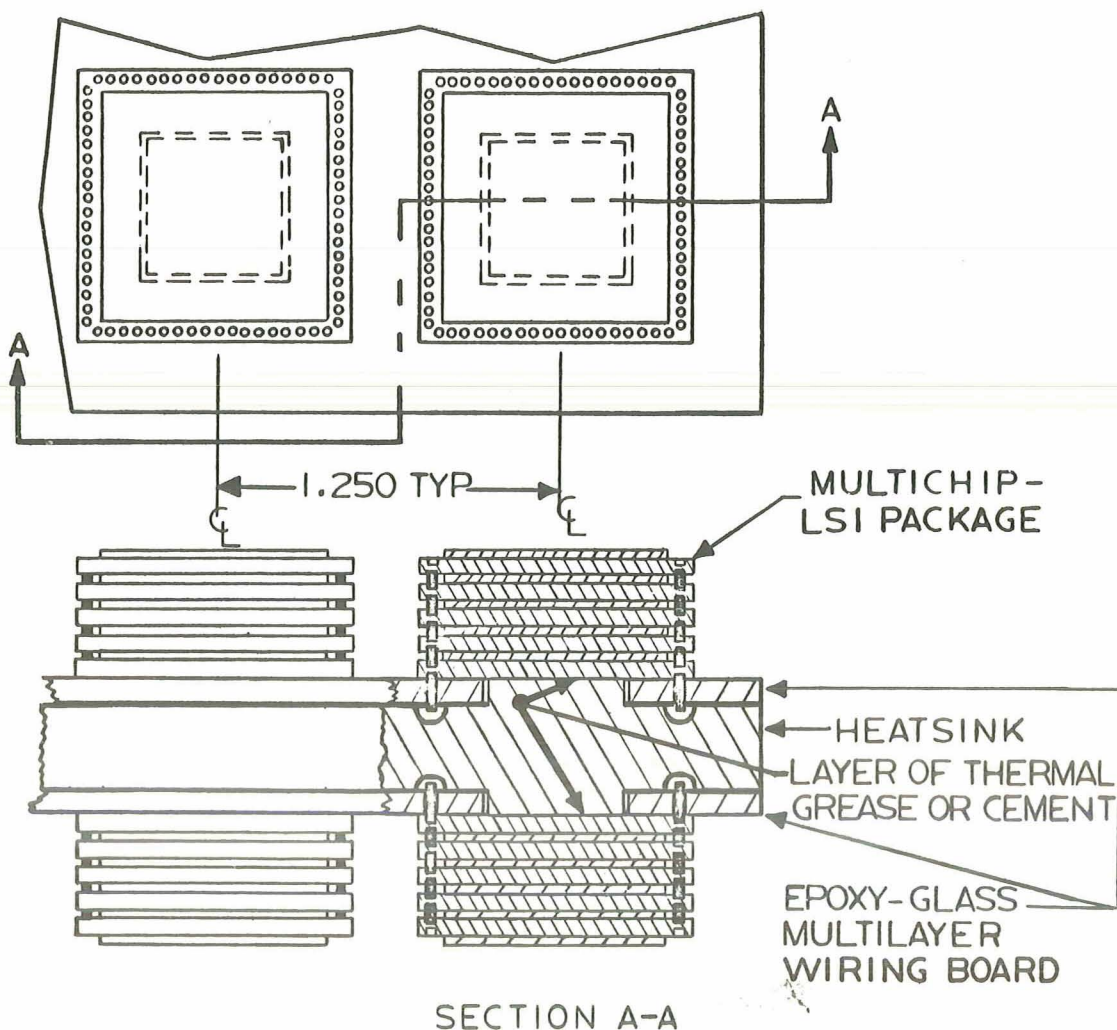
Module (made from five multichip-LSI packages) soldered directly into an epoxy-glass multilayer wiring board.
